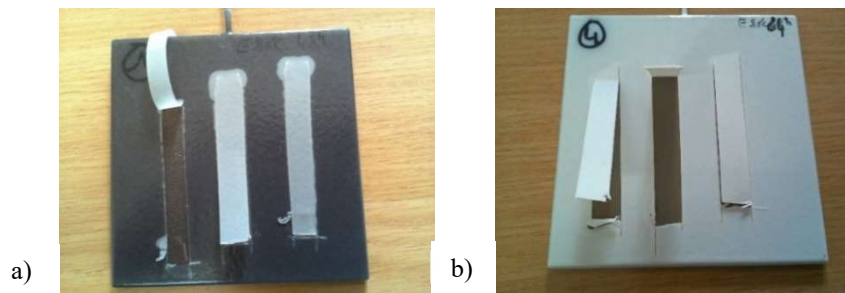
7: Adhesion test - immersed in water test (24h 80 °C); cutting method and appearance of the metal coating: a) PA11; b) 40 wt% glass hybrid coating.
